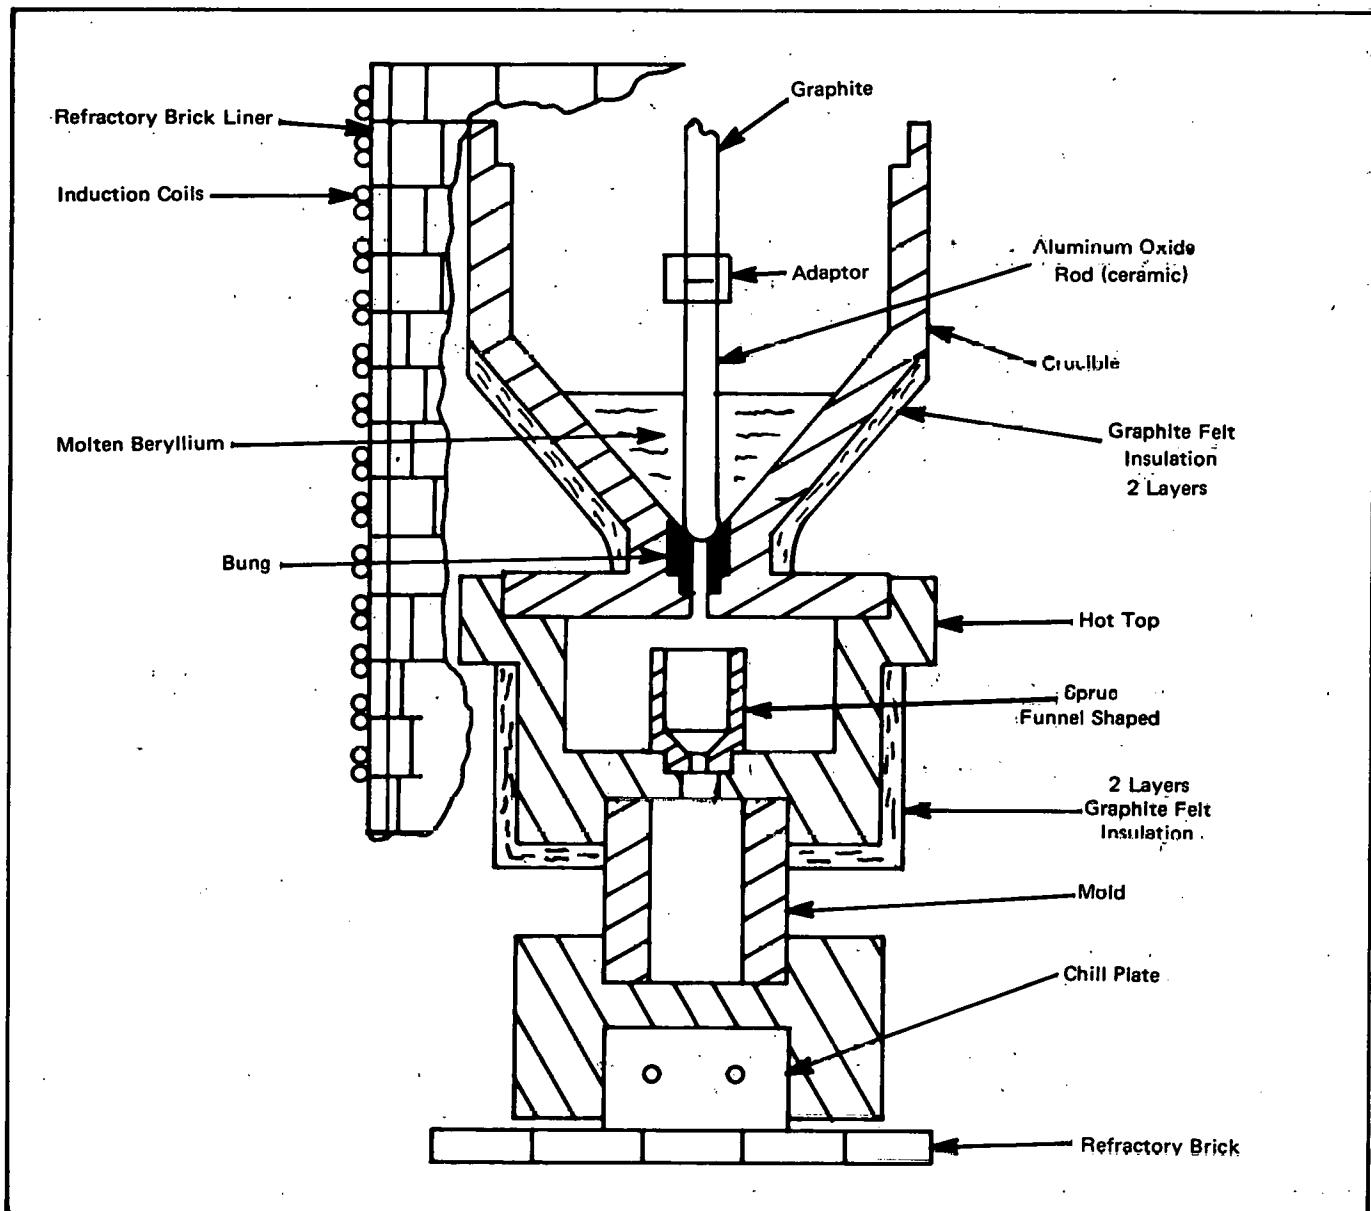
Casting Setup Used for Casting Small Research Ingots.
